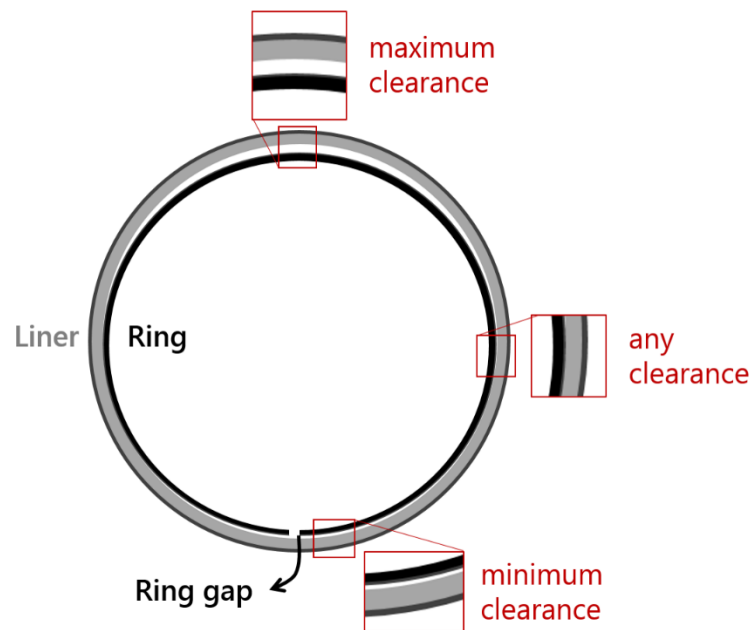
Non-constant circular gap in the ring-liner assembly.
